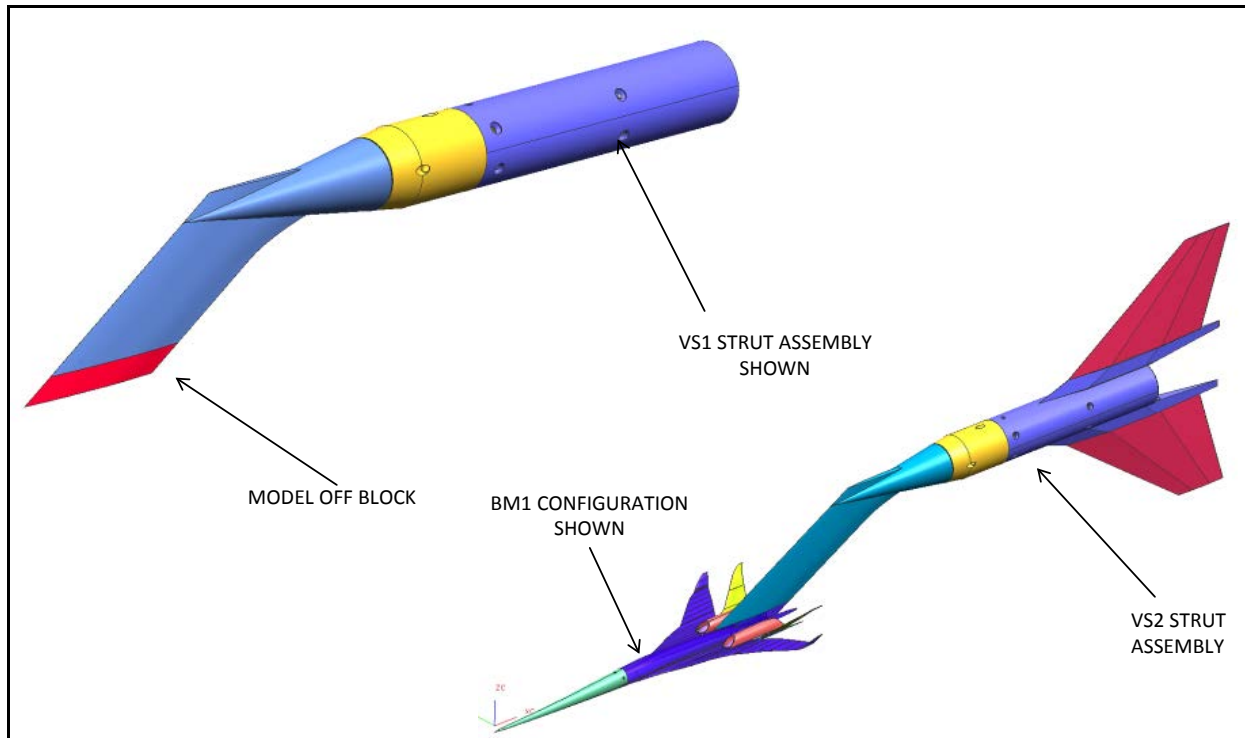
Boom Model 1 Assembly Shown at PDR
